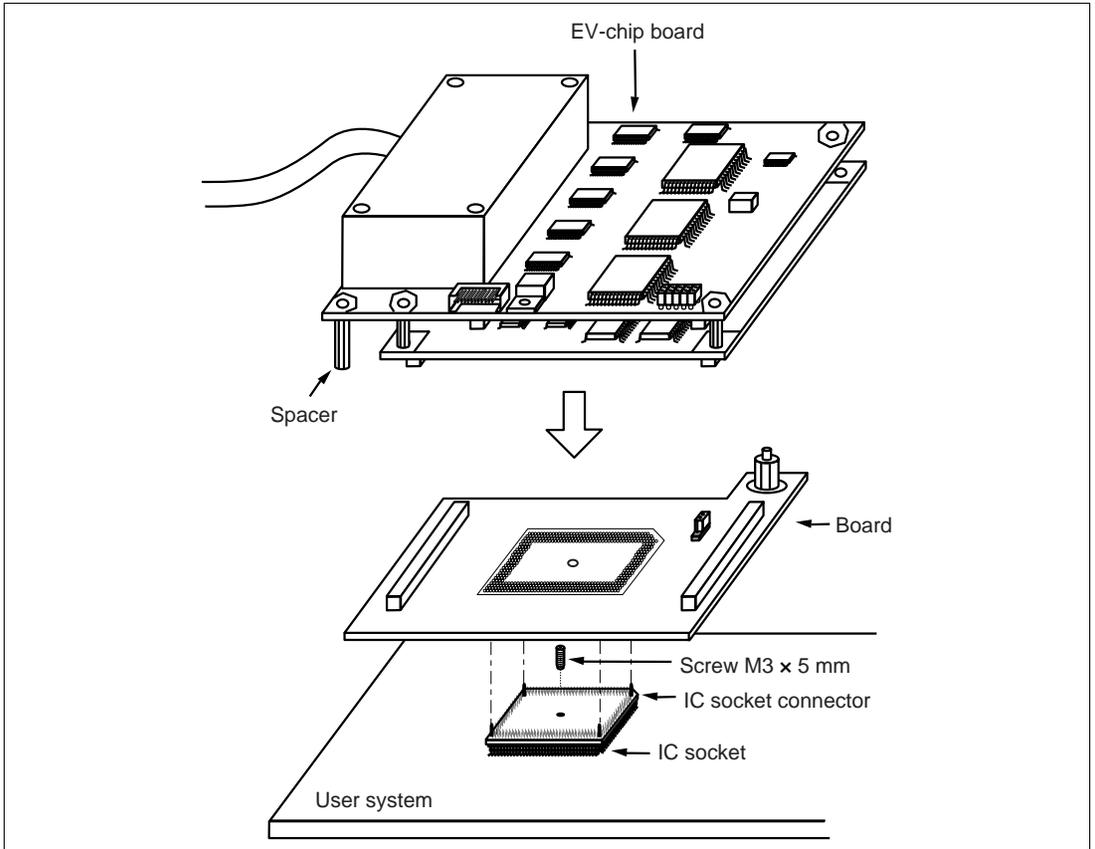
User System Interface Board for the SH7058 FP-256H Package
